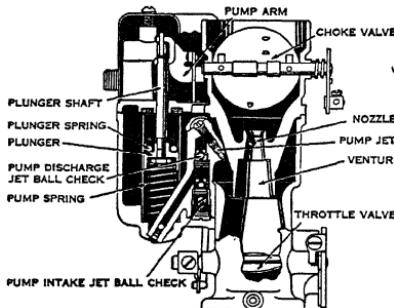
Sectional View of Chevrolet Down-Draft Carburetor from Side
